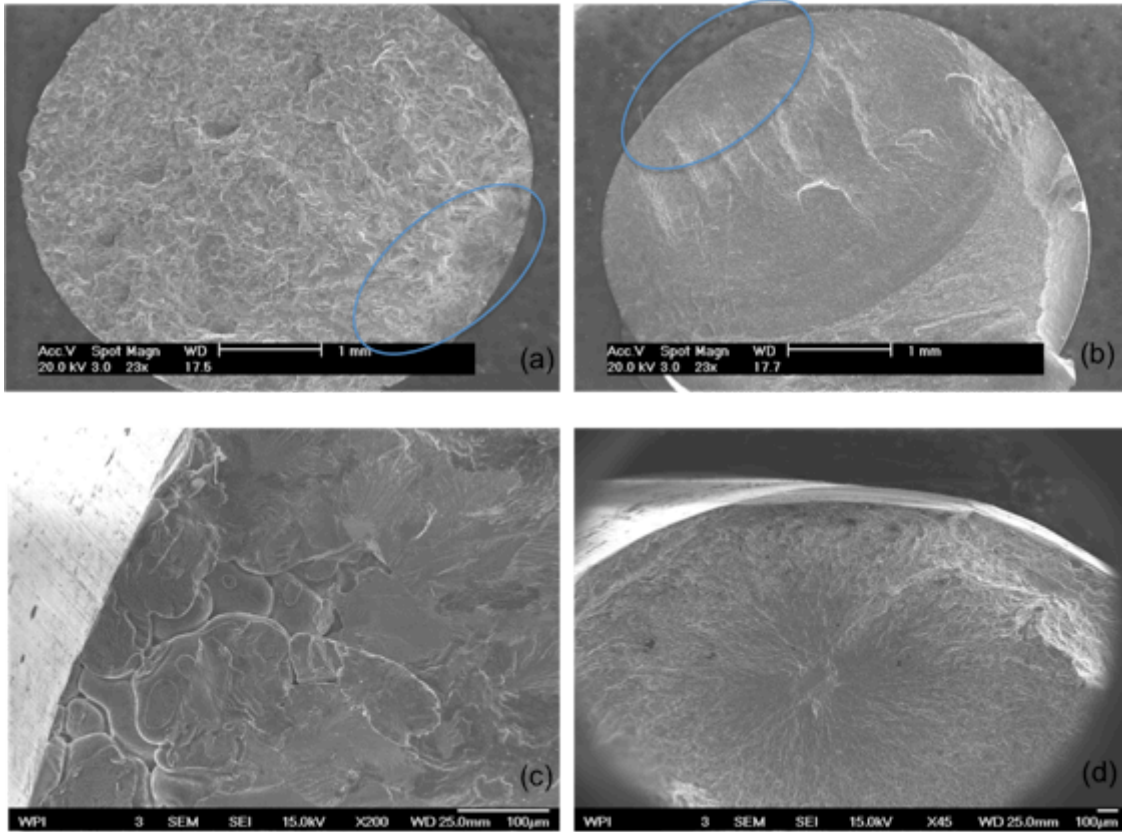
SEM images showing (a) the fracture surface of the as-cast specimen; (b) the fracture of the FSPed specimen; (c) the fatigue crack initiator of the as-cast specimen; (d) the fatigue crack initiator of the FSPed specimen.
